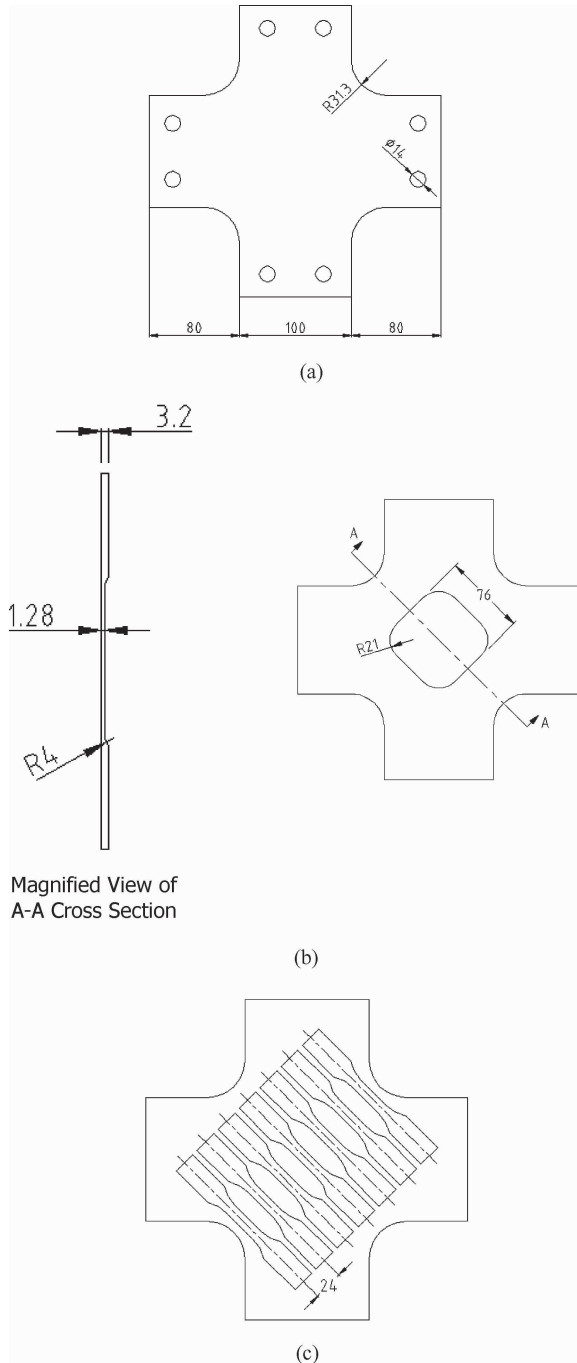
(a) Dimensions of cruciform specimens used for the fatigue loading, (b) dimensions of the central region with reduced thickness, (c) the relative position of 7 dog-bone specimens machined from a cruciform specimen.
